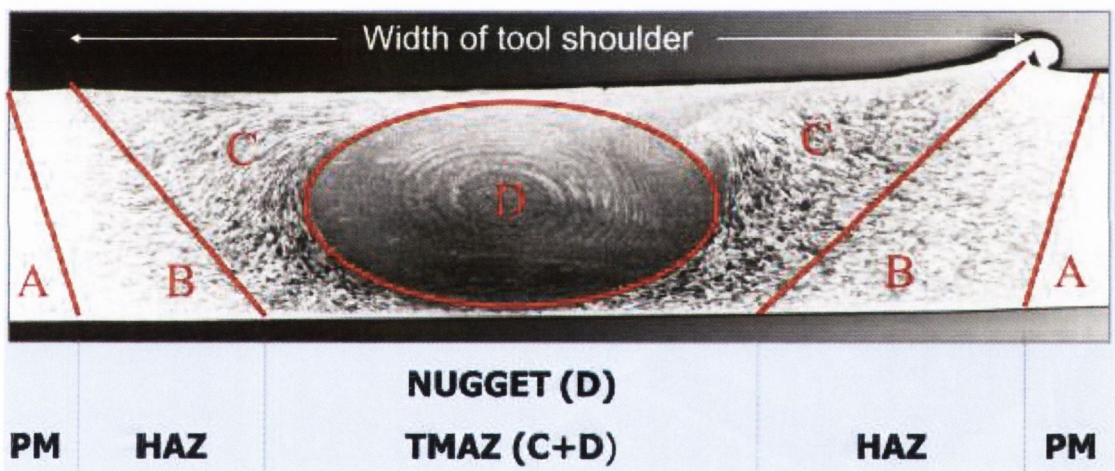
Weld Zones in the FSW of aluminium [40]
